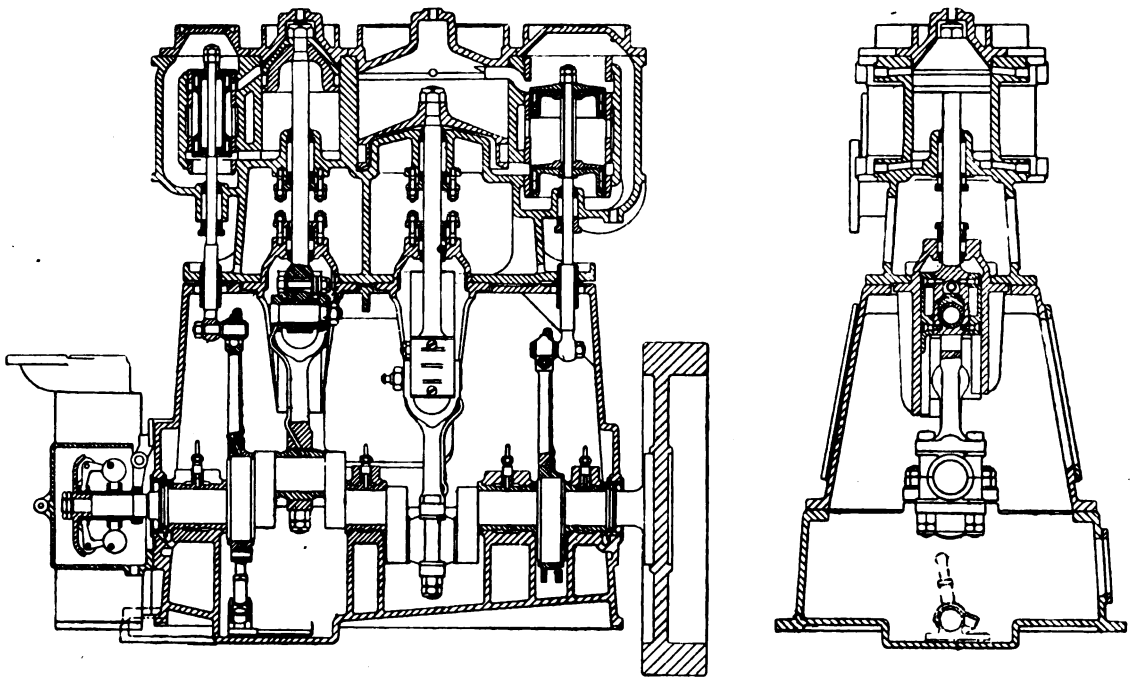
HIGH-SPEED DOUBLE-ACTING ENGINE.
